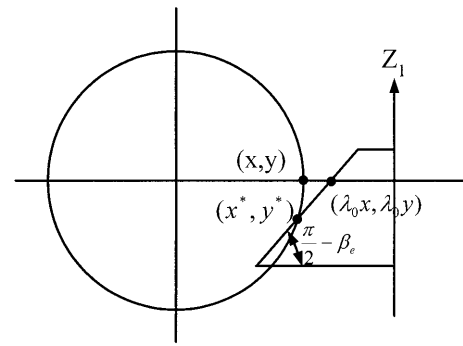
The definition of the adjusted wheel angle λ_0 .
